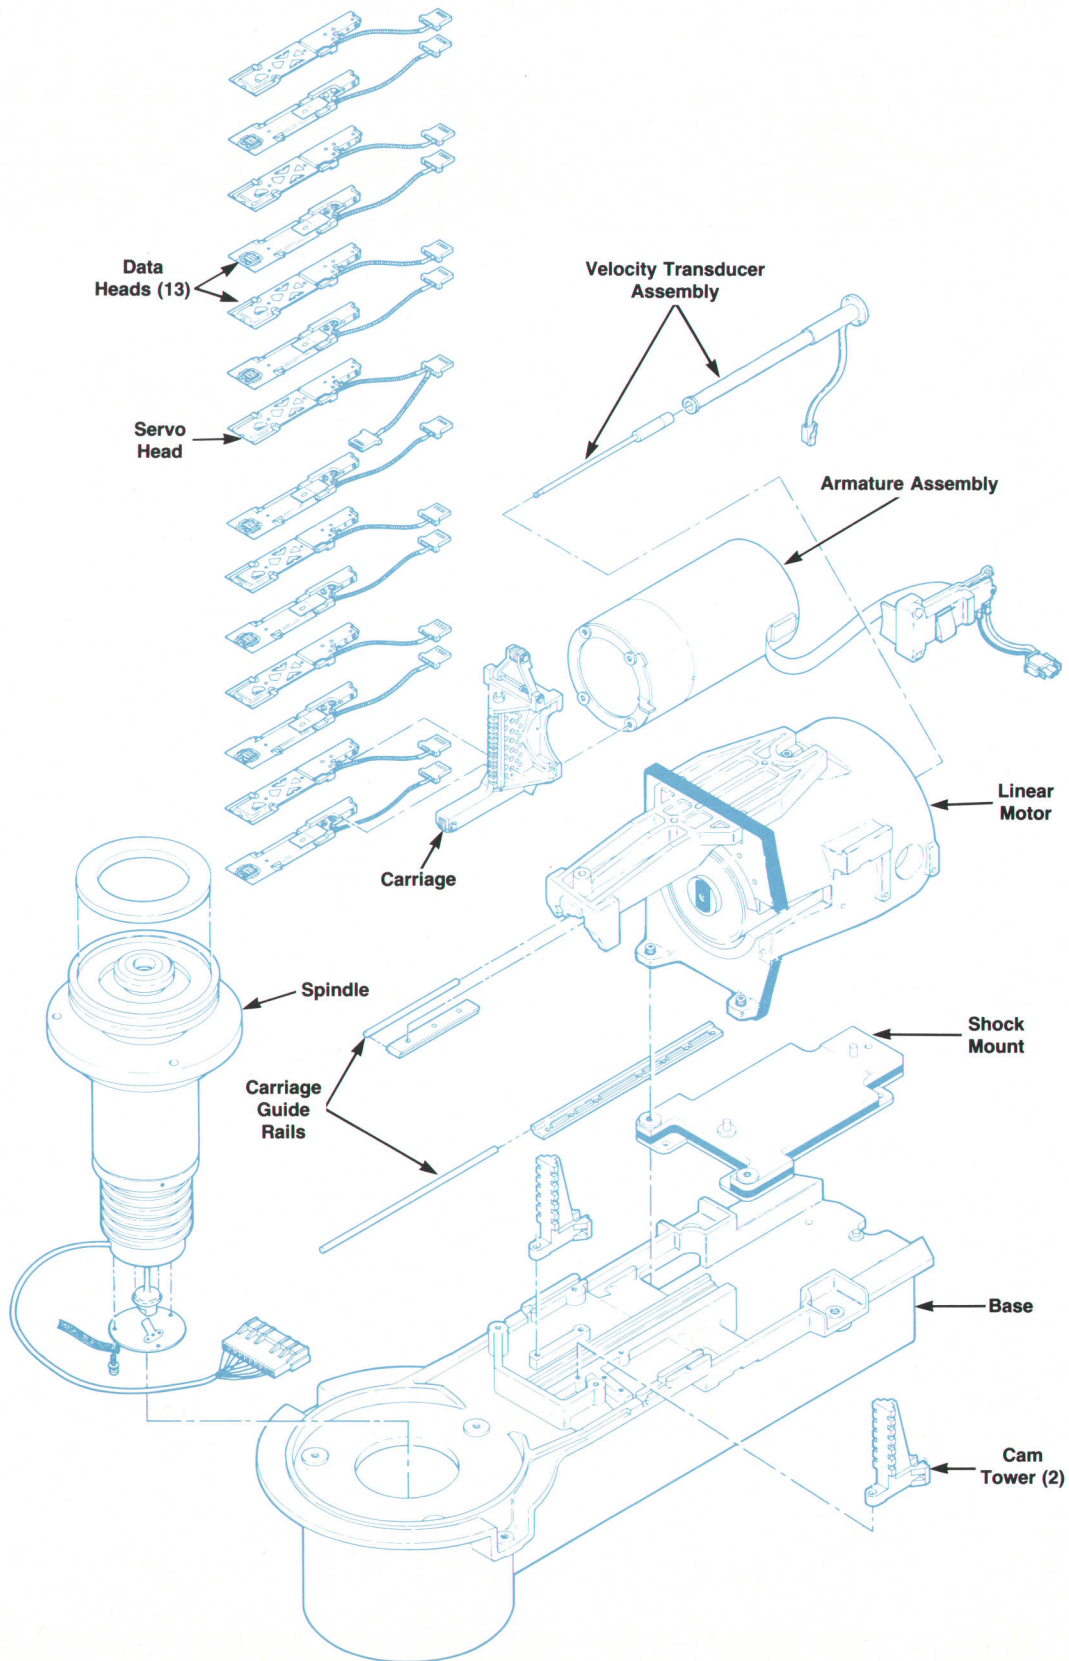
Elements of the actuator spindle base assembly, the major mechanical component of the 7533/35 Disc Drives.
